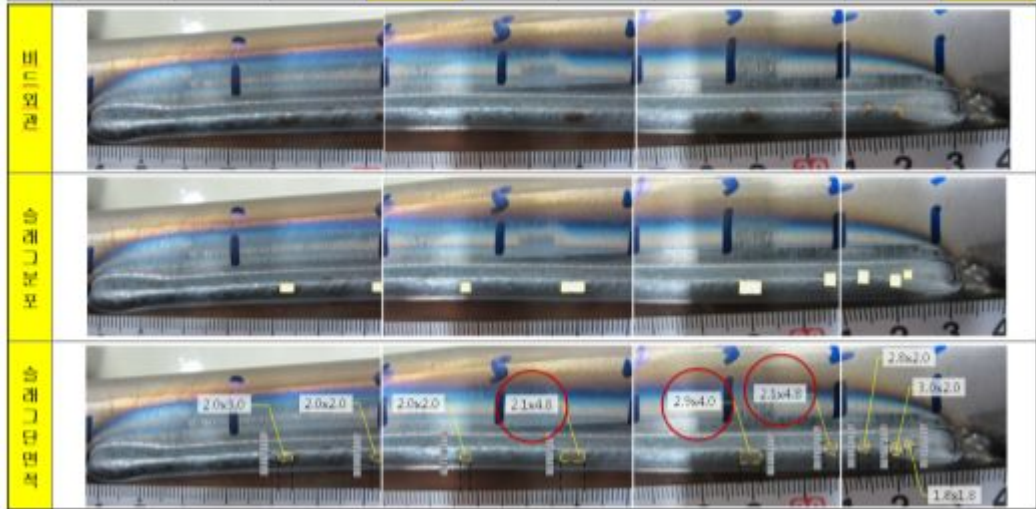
Dynamic-2.0%, Back step welding
